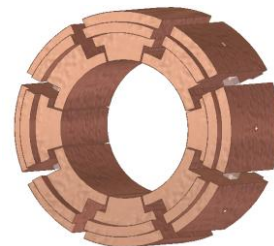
Three dimensional schematic view of the segmented ring electrode
